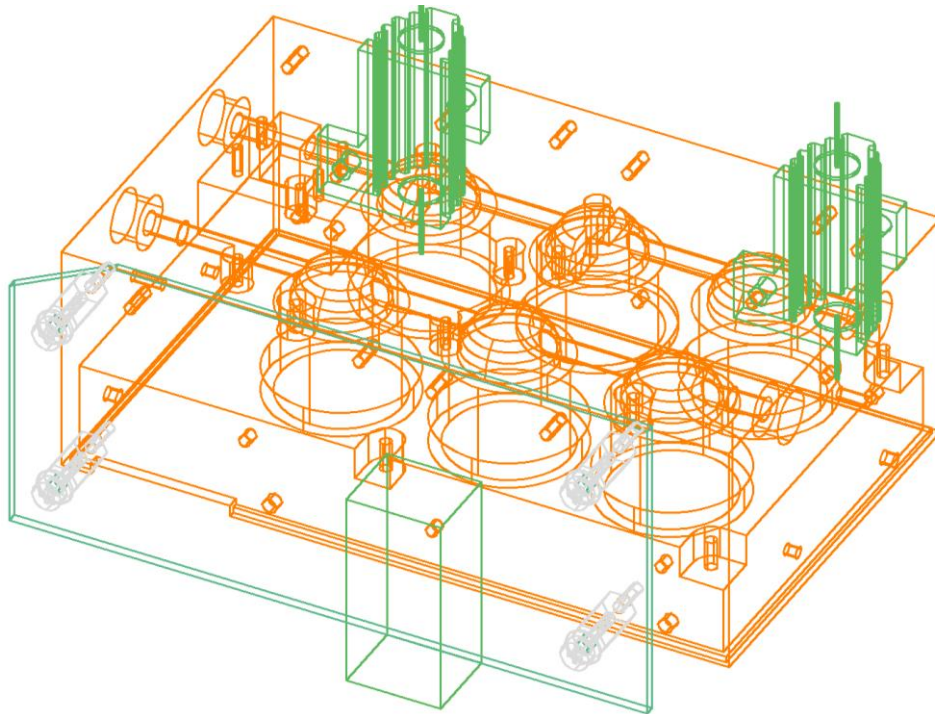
3D view of the microcontroller PCB mounted on the manifold with 10mm standoffs.
